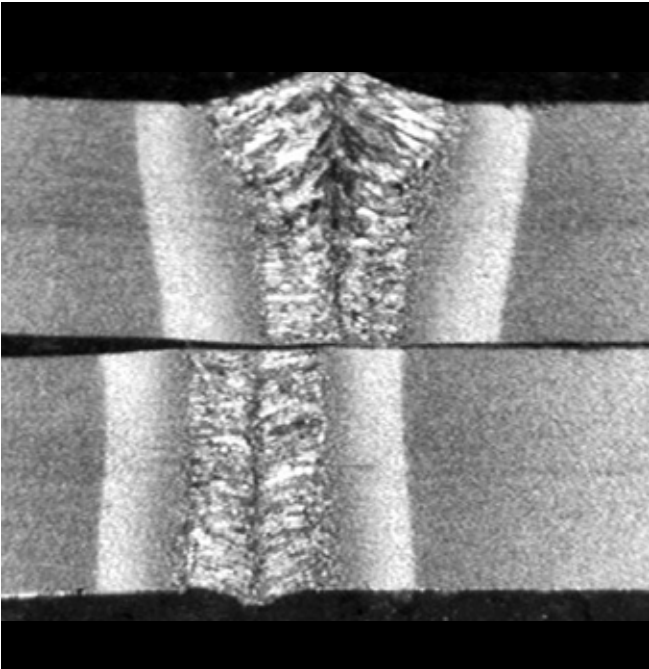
Cross section of fractured tensile shear specimen for a laser lap weld. The weld has fractured by shearing of the weld metal at the interface between the sheets.
